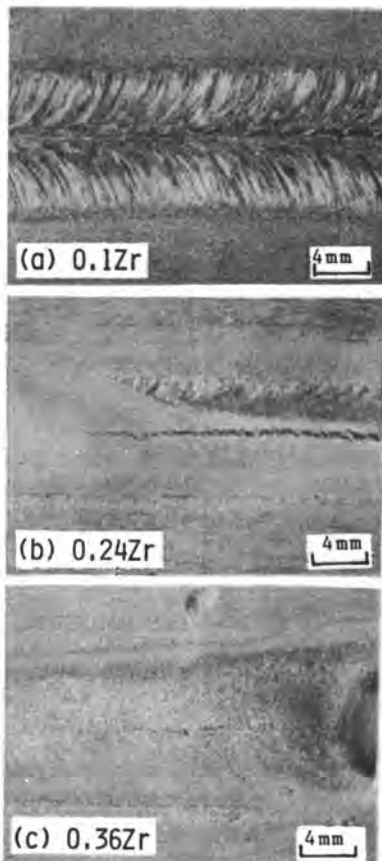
Appearance of weld bead showing near tip of crack
